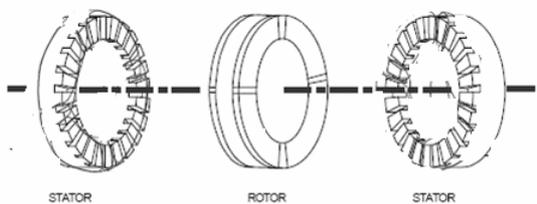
An example of an axial flux machine with a single rotor-double stator assembly, see [11]
